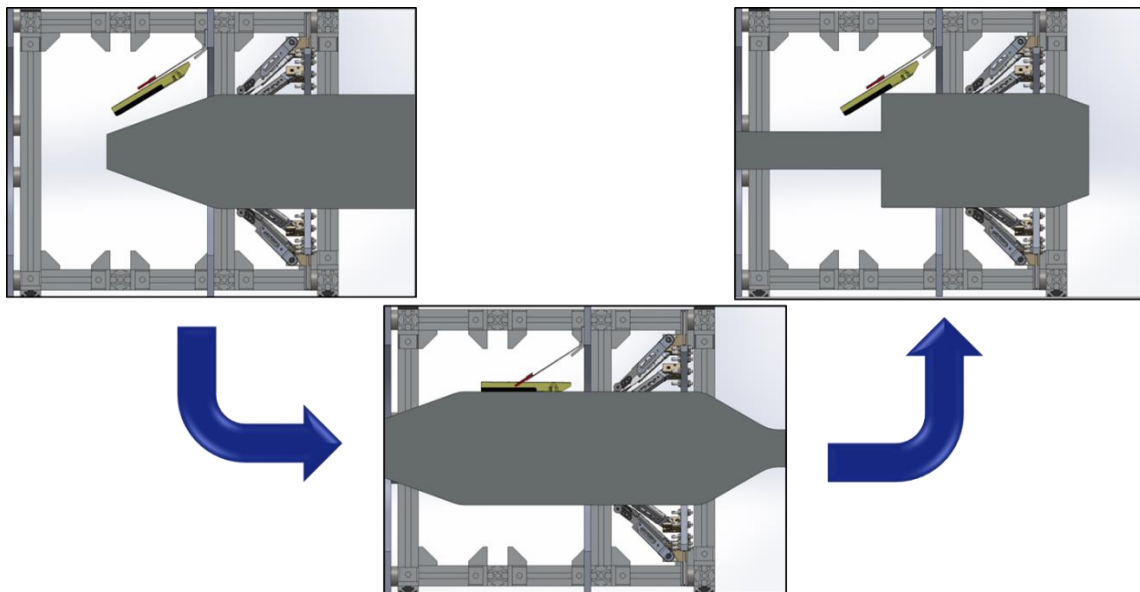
24: Working inspection system illustration, where the dynamics of the EC probes and geometric sensors can be observed.
